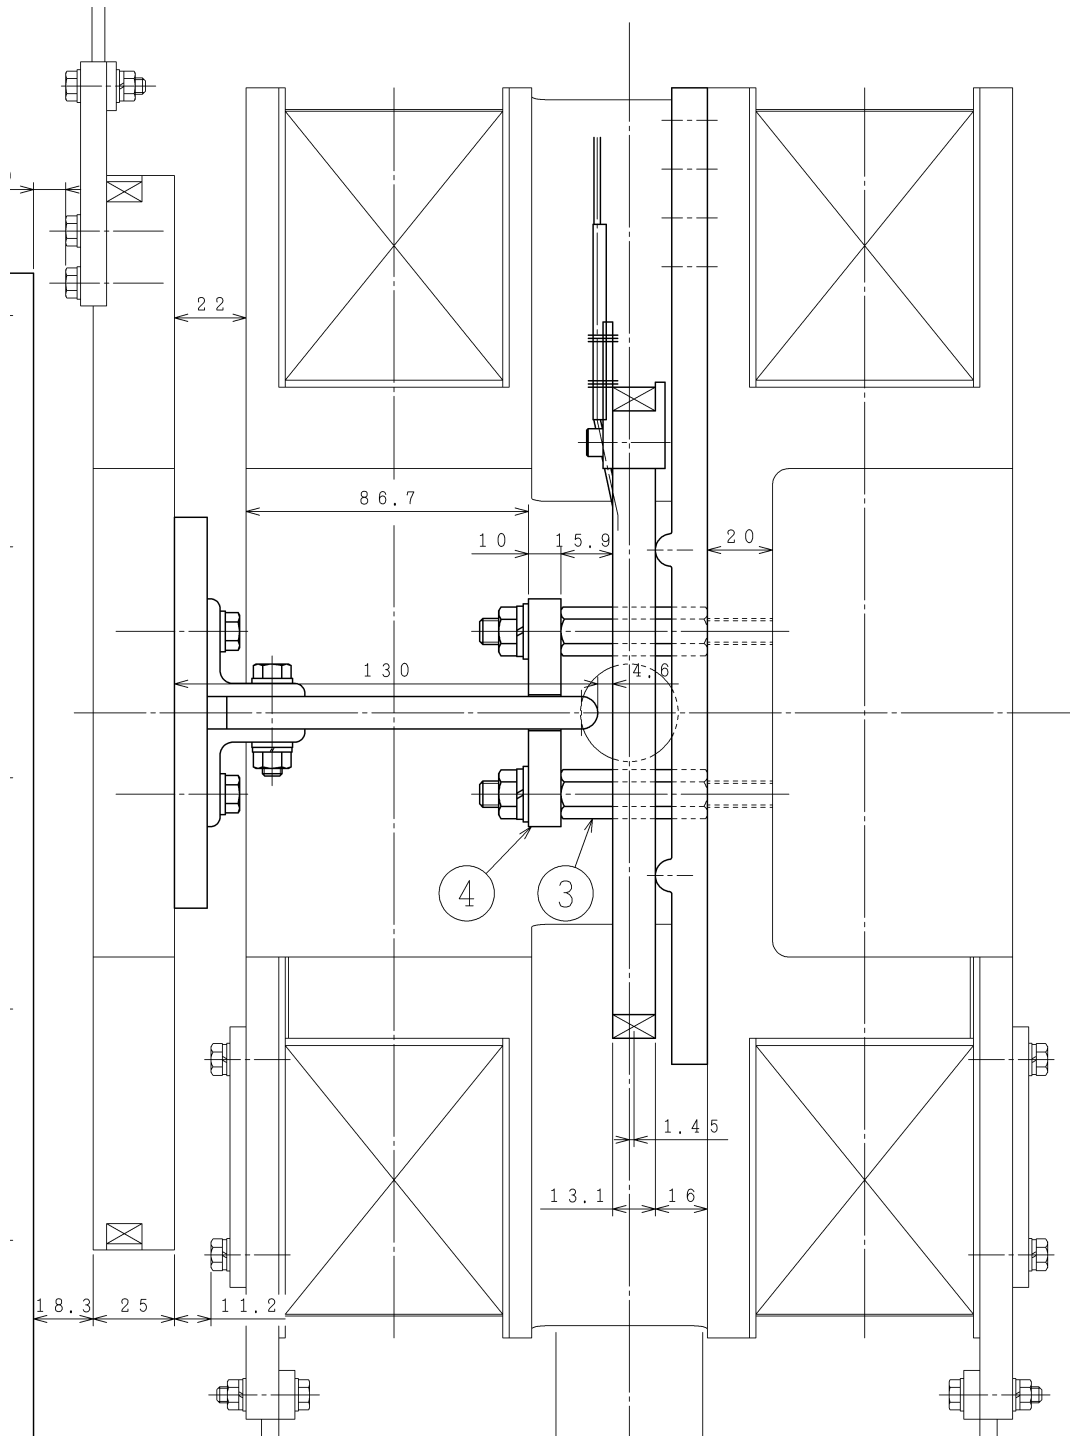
Cross-sectional drawing of the three-point bending test stand
